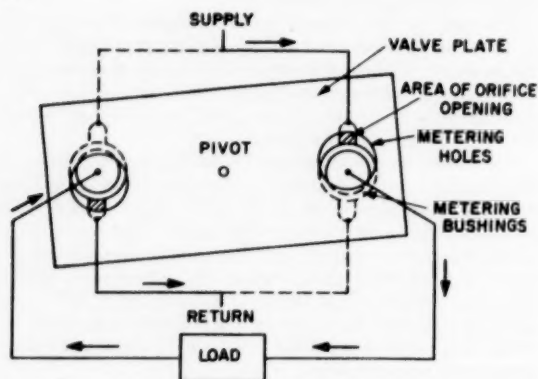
SCHEMATIC DRAWING OF ROTARY-PLATE VALVE IN DISPLACED POSITION
